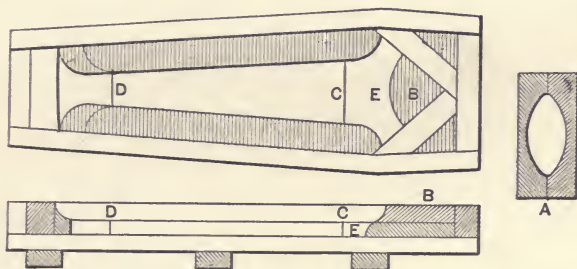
PLAN AND SECTION OF ARM CORE-BOXES.
